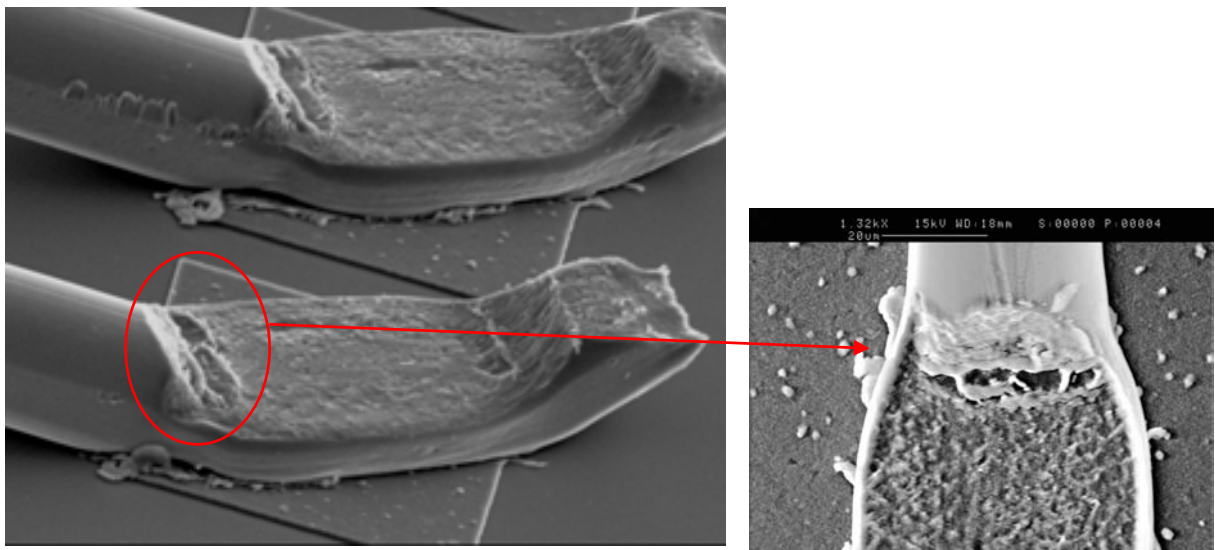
Heel crack condition of the bond formed by the conventional PZT transducer.
